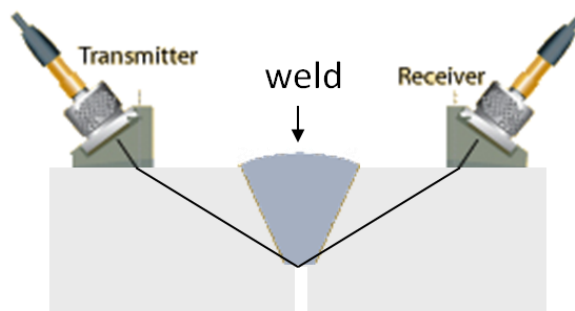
Example of weld inspection by using PZTs
